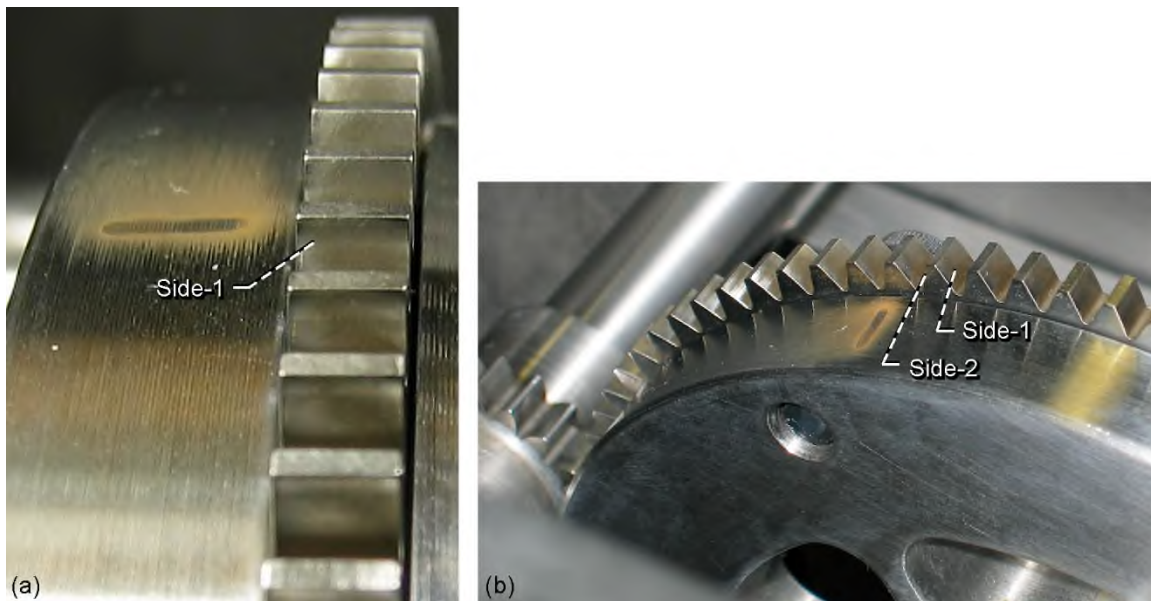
(a) Pre-test photo of ring gear teeth showing side-1. (b) Pre-test photo showing another view of ring gear teeth, side-1 and side-2.
